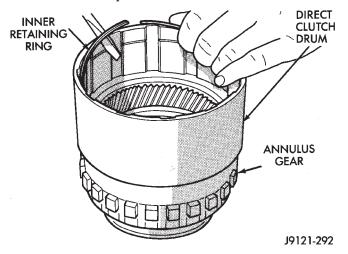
Clutch Drum Inner Retaining Ring Removal
